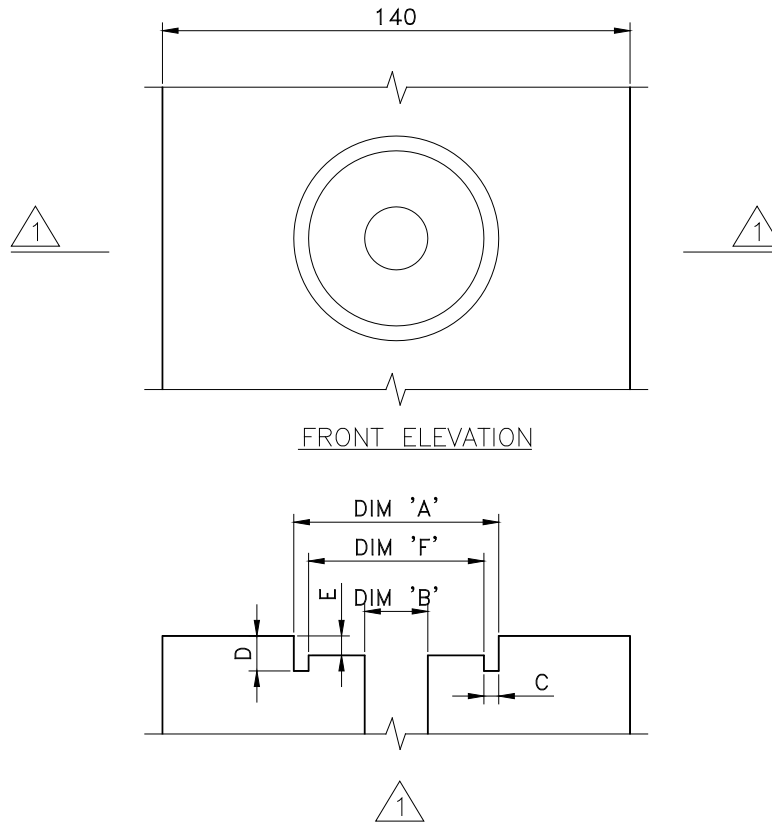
(b) TYPICAL CROSS SECTION
